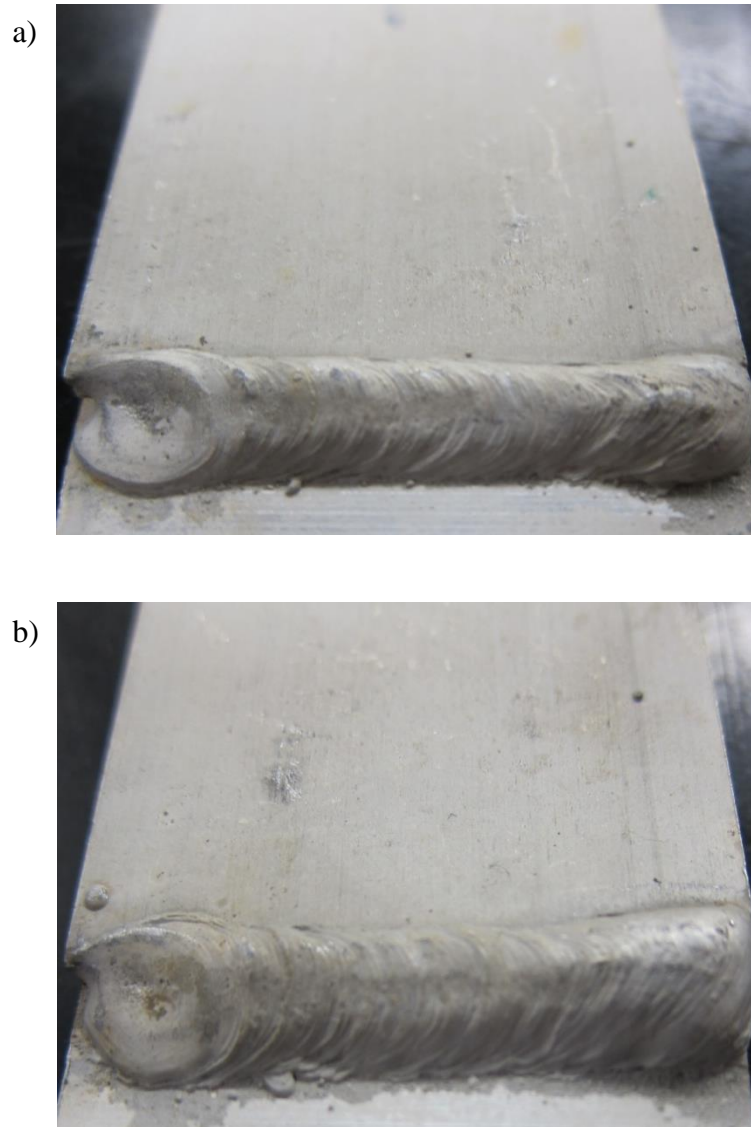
Close-up images of lap-joint welded configuration A (ER5356/AA7003/L) in the (a) as-welded T6 condition and the (b) as-welded T6+PB condition post exposure to GMW-14872.
